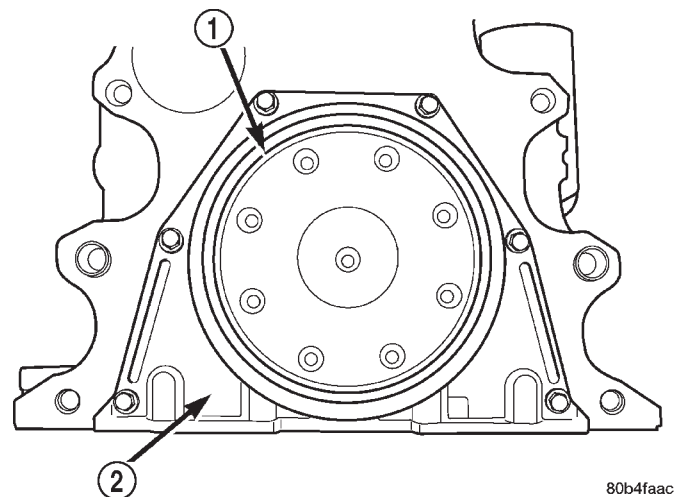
Aligning Seal Retainer with Alignment/Installation Tool
